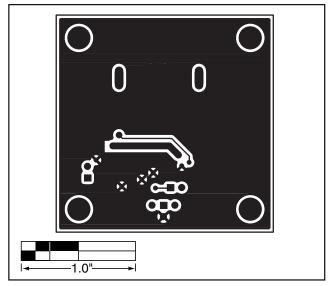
MAX1830 EV Kit PC Board Layout—Solder Side
